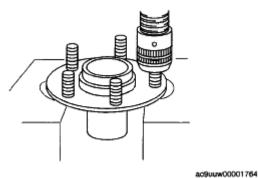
Pressing Hub Bolt Courtesy of MAZDA MOTORS CORP.
